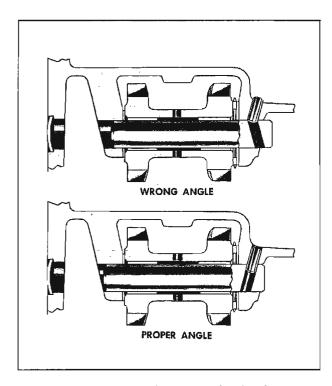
Reverse Idler Gear Shaft and Lock Pin
